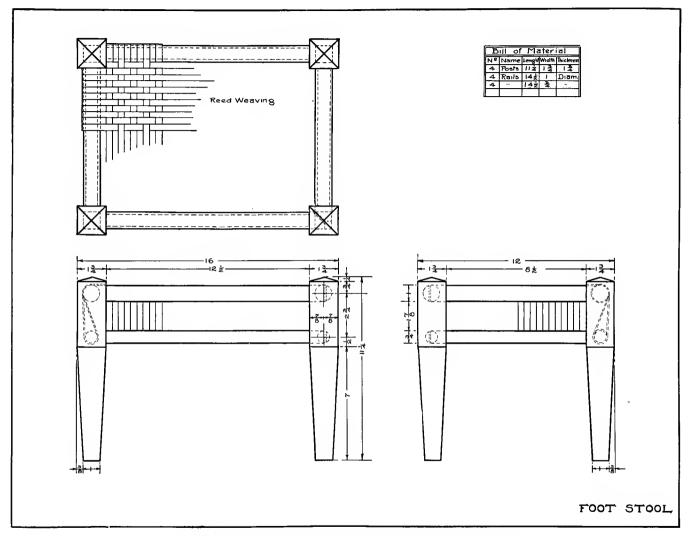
Working Drawing of Foot Stool (Seventh Grade)
